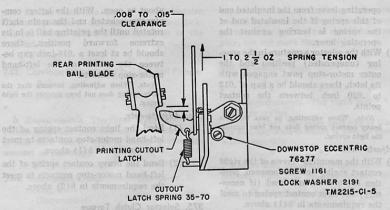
(Added) Printing cutout latch downstop eccentric.
